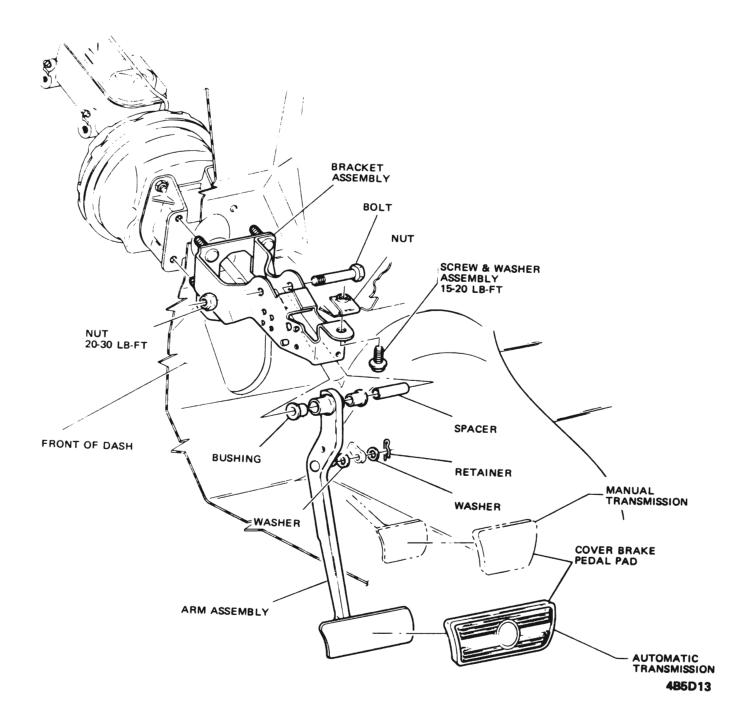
D-13 Brake Pedal Mounting - A Car Power Brake
